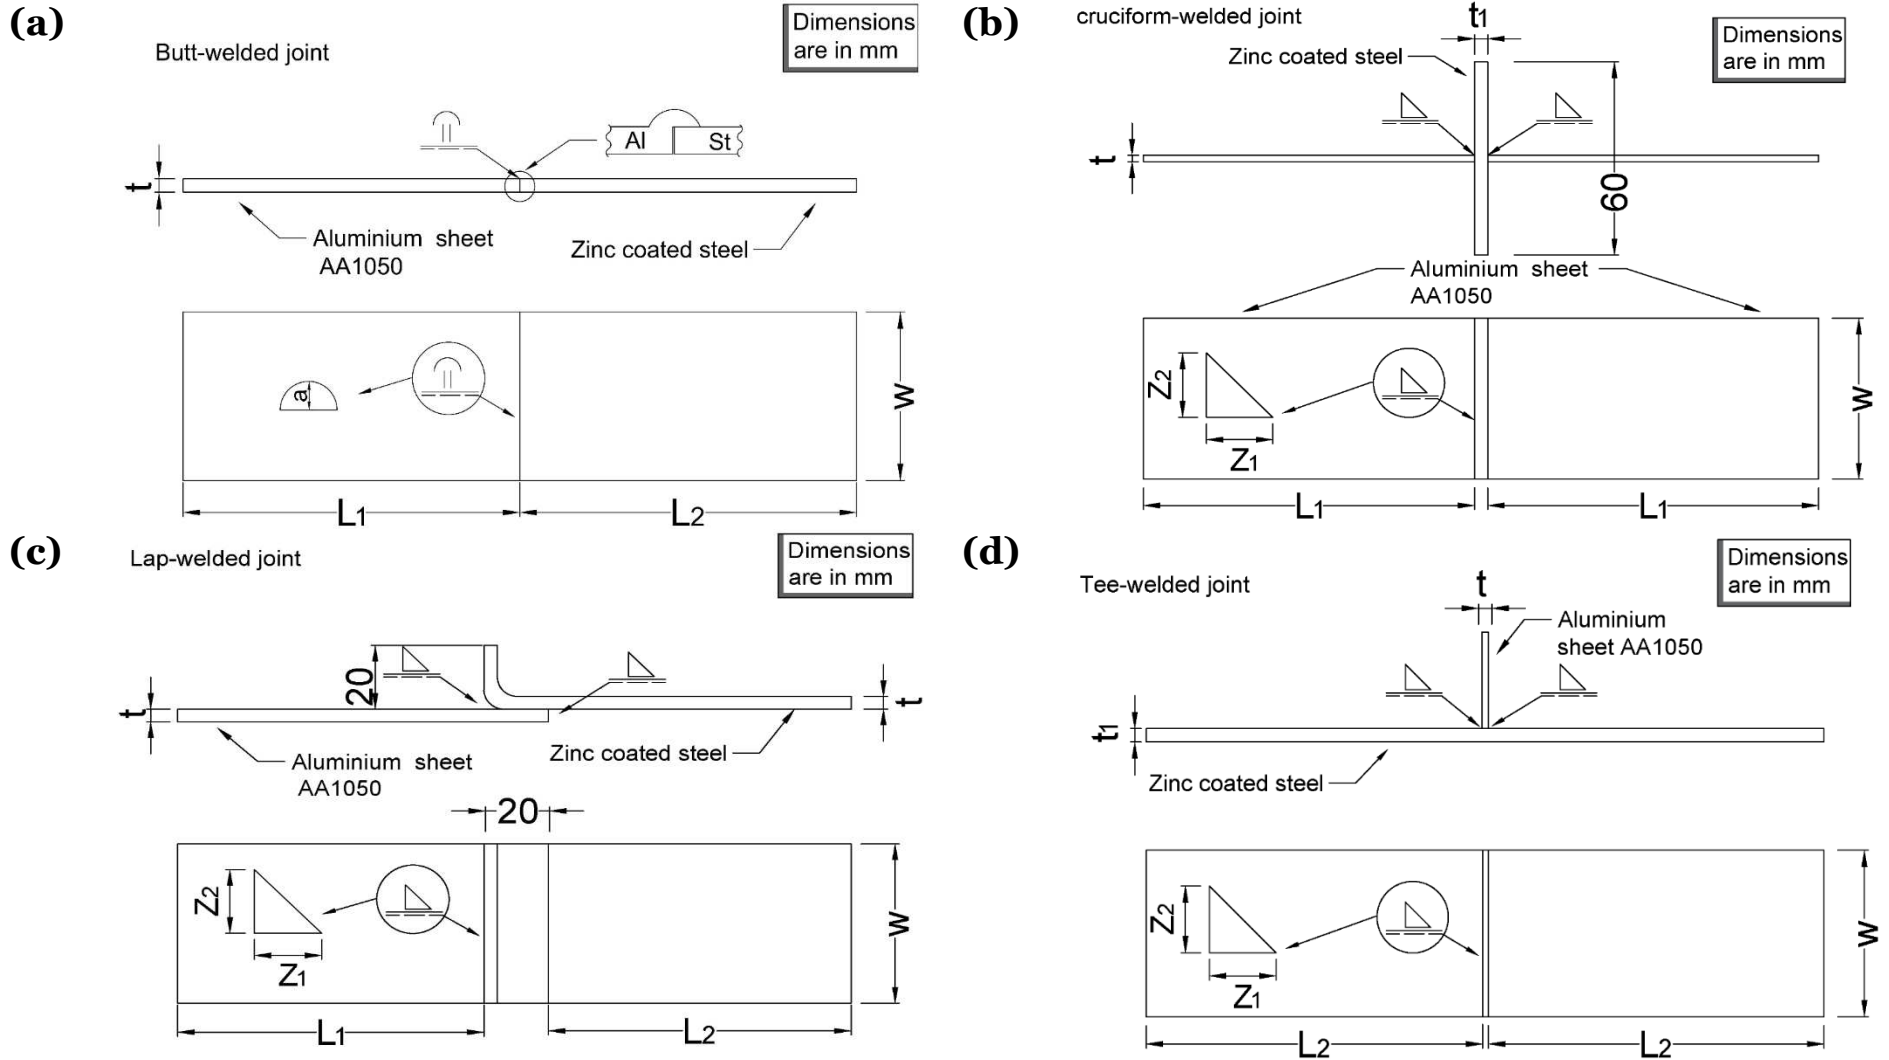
Geometry of the investigated aluminium-to-steel welded joints, butt-welded joints (a); and the load carrying cruciform welded joints (b); lap-welded hybrid welded joints (c); and the tee welded joints (d).
